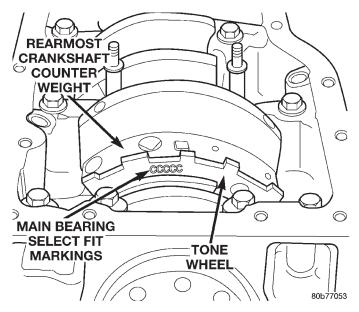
Main Bearing Markings on Target Wheel MAIN BEARING SELECTION CHART—4.7L
